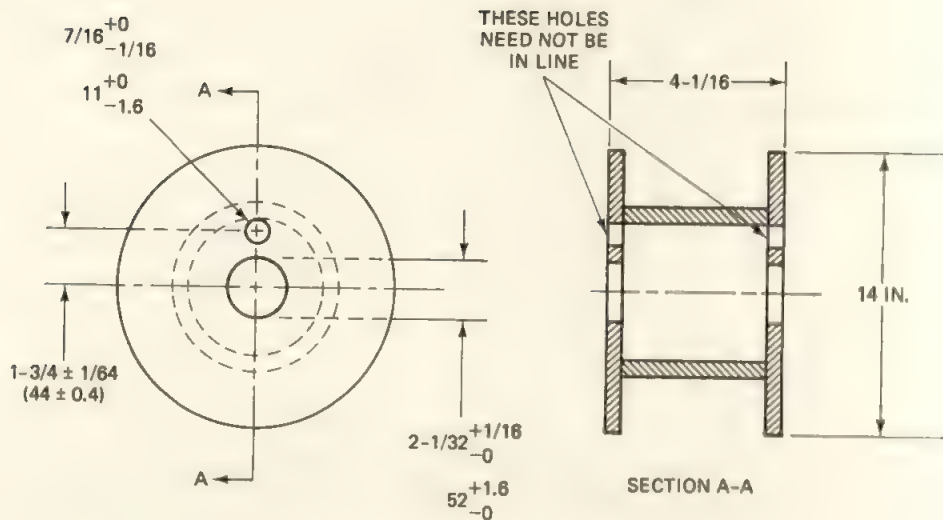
Fourteen-inch standard spool and dimensions.
